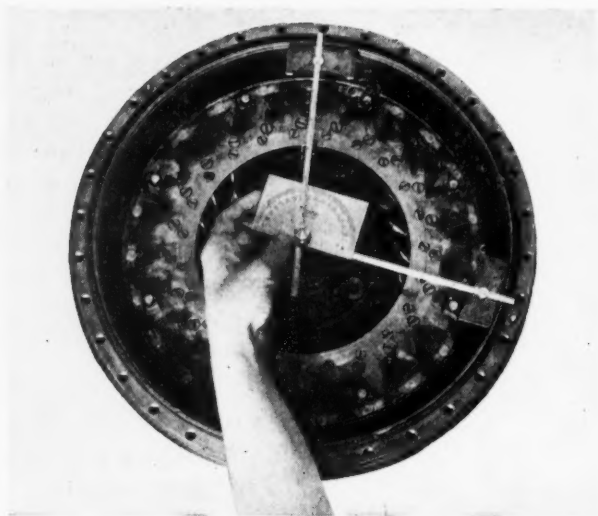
(Below Left) Method of Checking Accuracy of Hole Spacing with "Arcometer." Fig. 3. (Below Right) Laying out Accurately Spaced Holes
